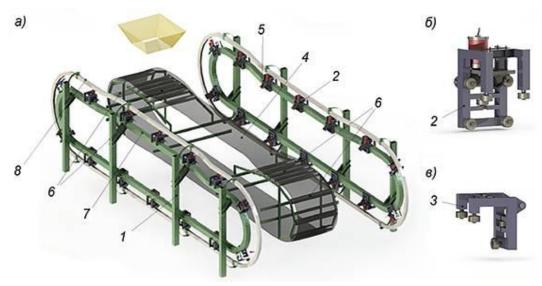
Conveyor design with suspended belt and distributed drive: a - conveyor layout diagram; B is a general view of the drive pendants; C - general view of non-guide suspension
